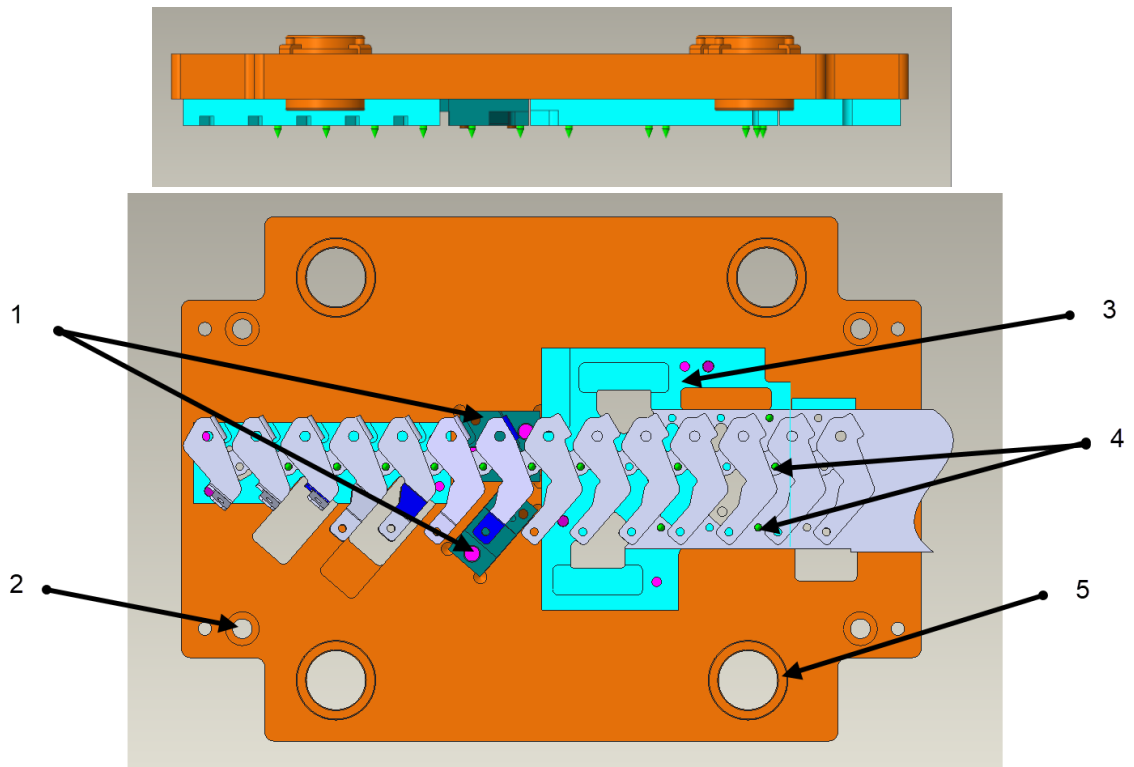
Main component groups and elements of progressive die stripper plate, front and top views. 1 – forming punches; 2 – holes for stripper holder pins; 3 – lower stripper plates; 4 – pilot pins; 5 – guide bushing
